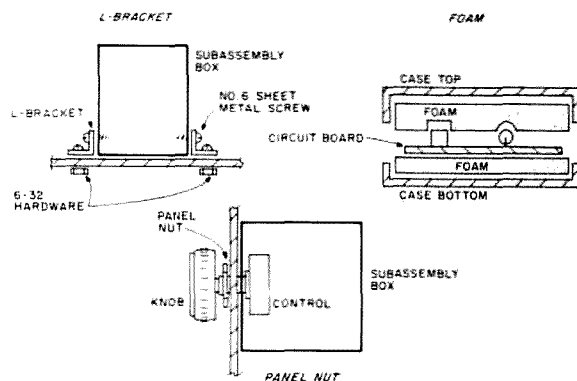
Three methods of mounting subassemblies: L-brackets, panel nuts, and foam.
